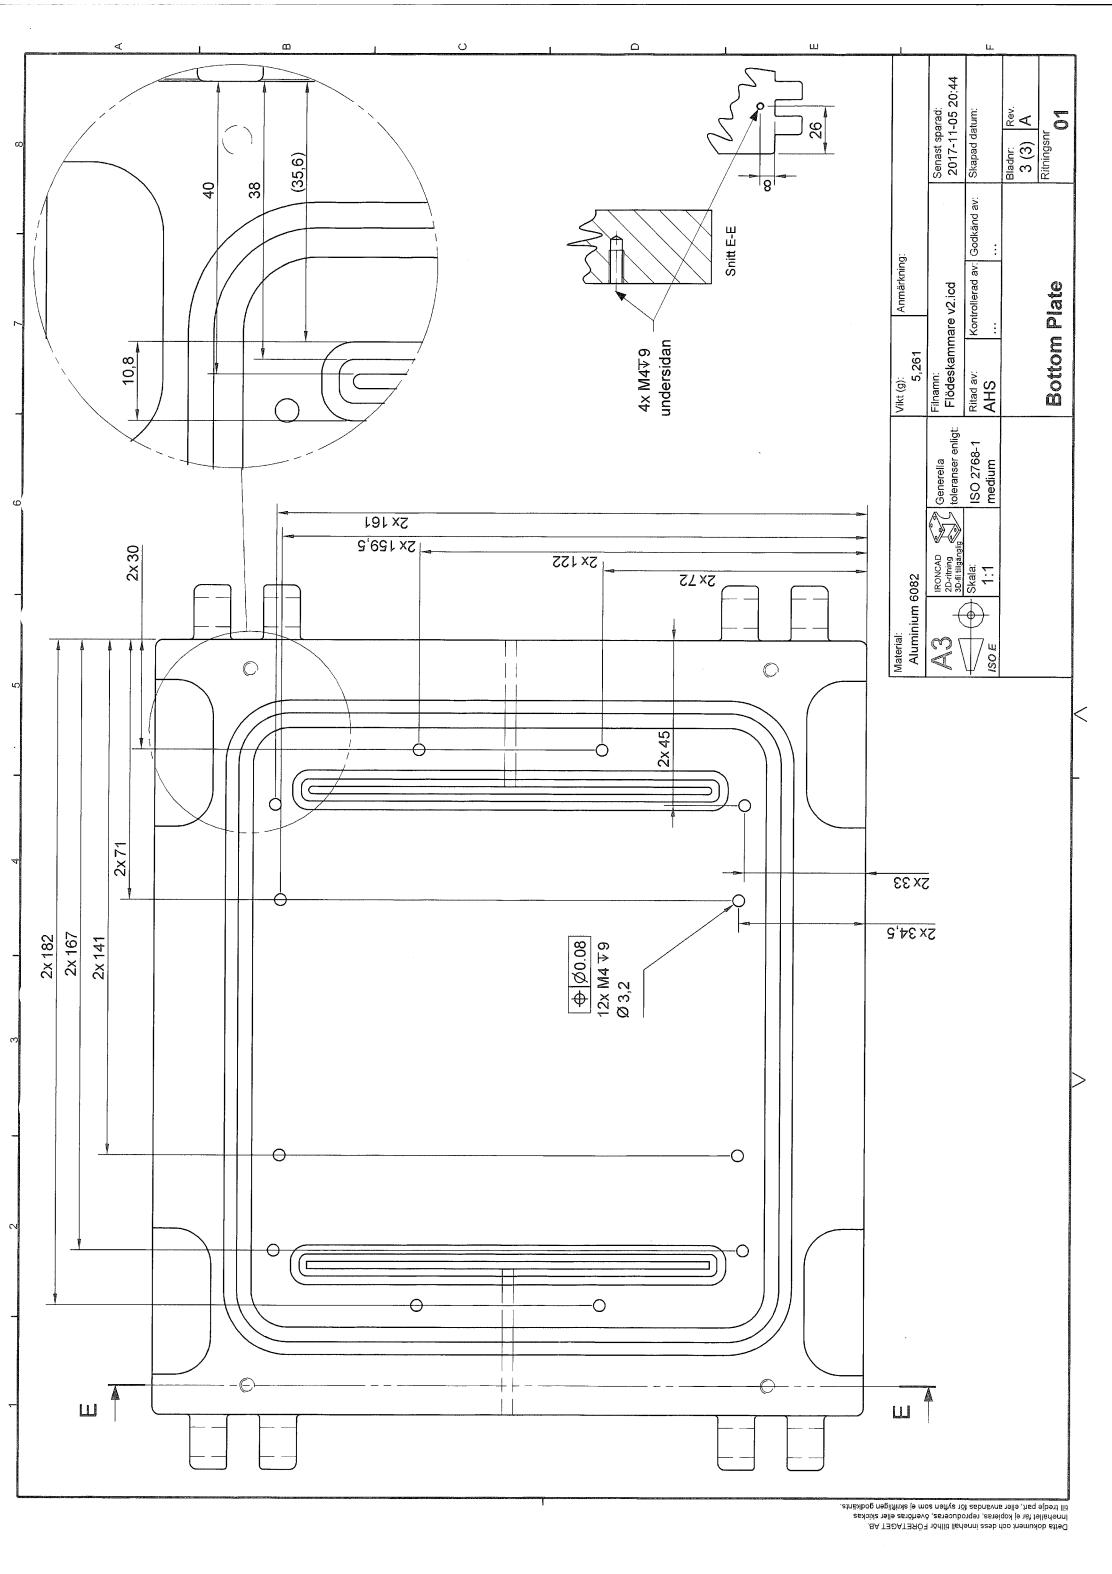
Technical drawing 3 (of 3) of the SVA chamber body. Distances are given in mm.
